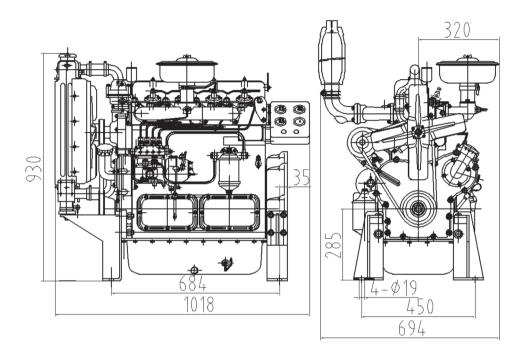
Longitudinal and sectional drawing for 495、4100、4102 diesel engine
